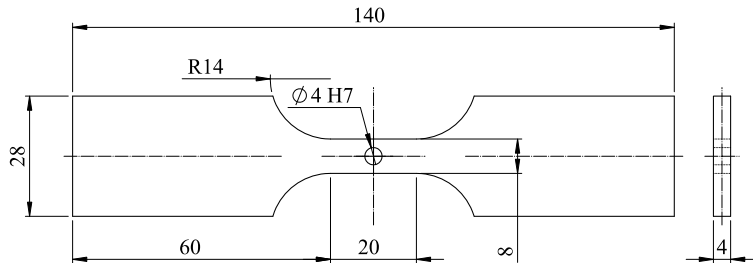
Notched plane specimen geometry of X60TT and X65TT piping steels.
